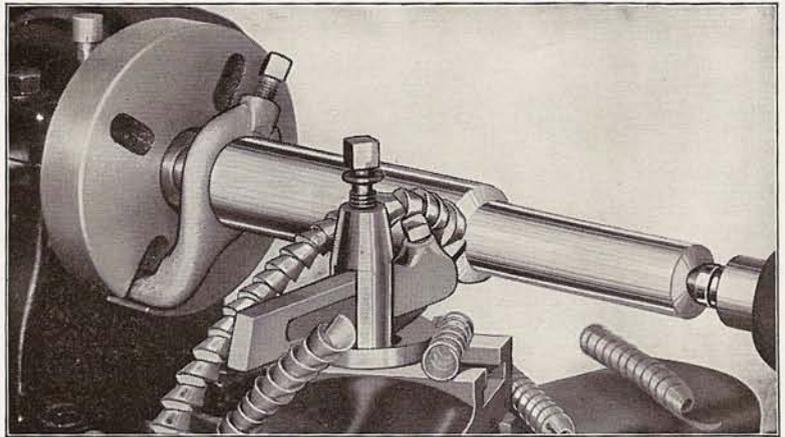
The 9-inch "Workshop" South Bend Bench Lathe will reduce the Diameter of a Steel Shaft $\frac{1}{4}$ " in One Cut.
